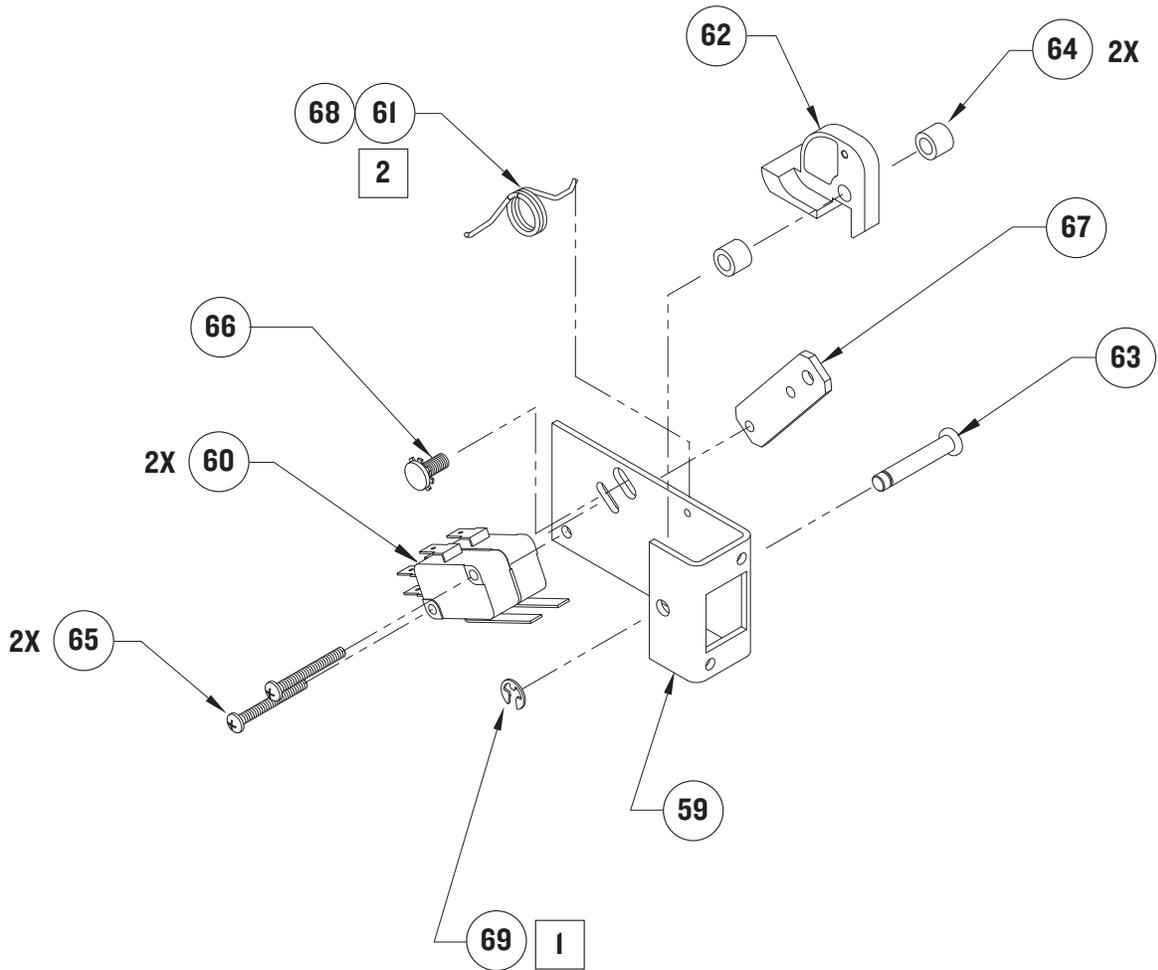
DOOR SWITCH ASSEMBLY AND PARTS
